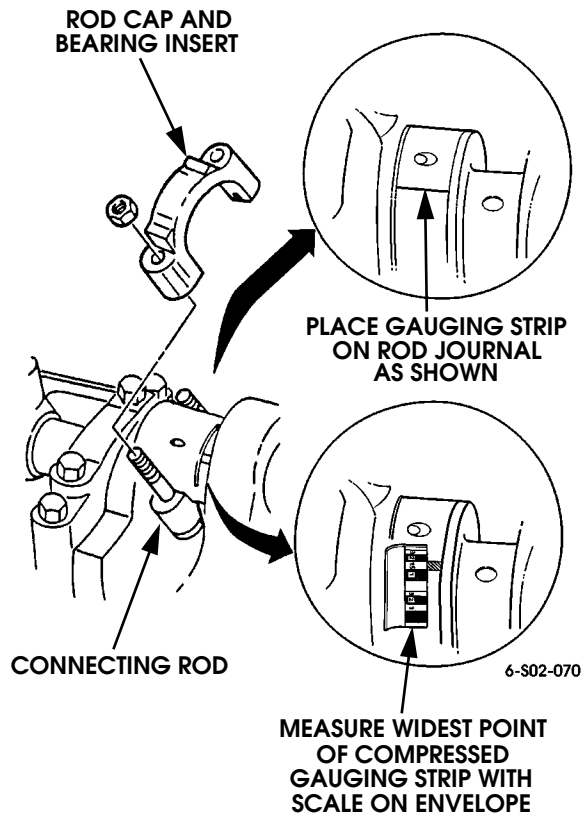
Measuring Connecting Rod Bearing Clearance with Plastic Gauging material
